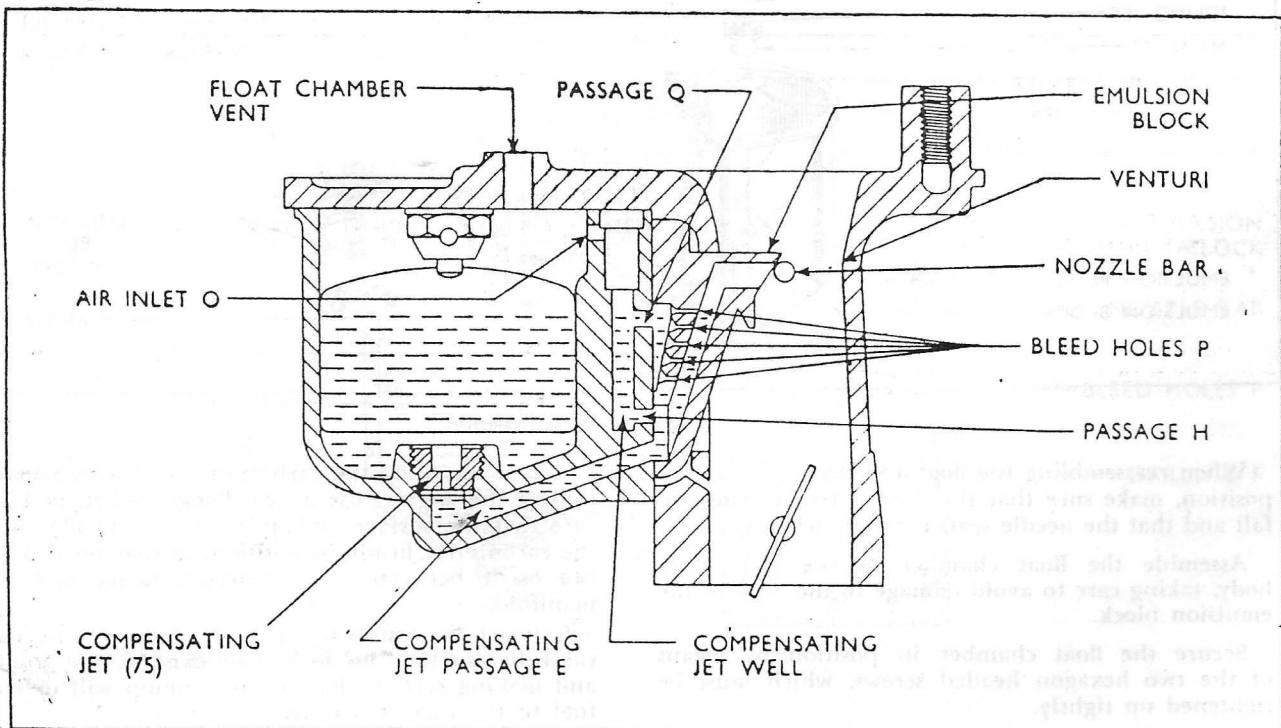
This view of the carburettor is taken through the compensating jet.
